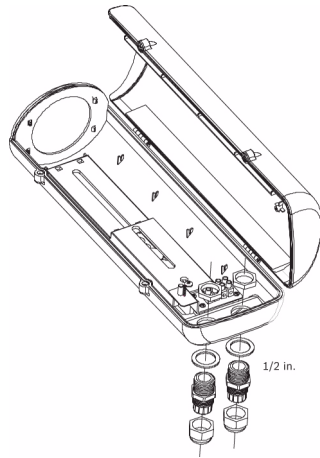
Attaching the 1/2 in. NPT Fittings
